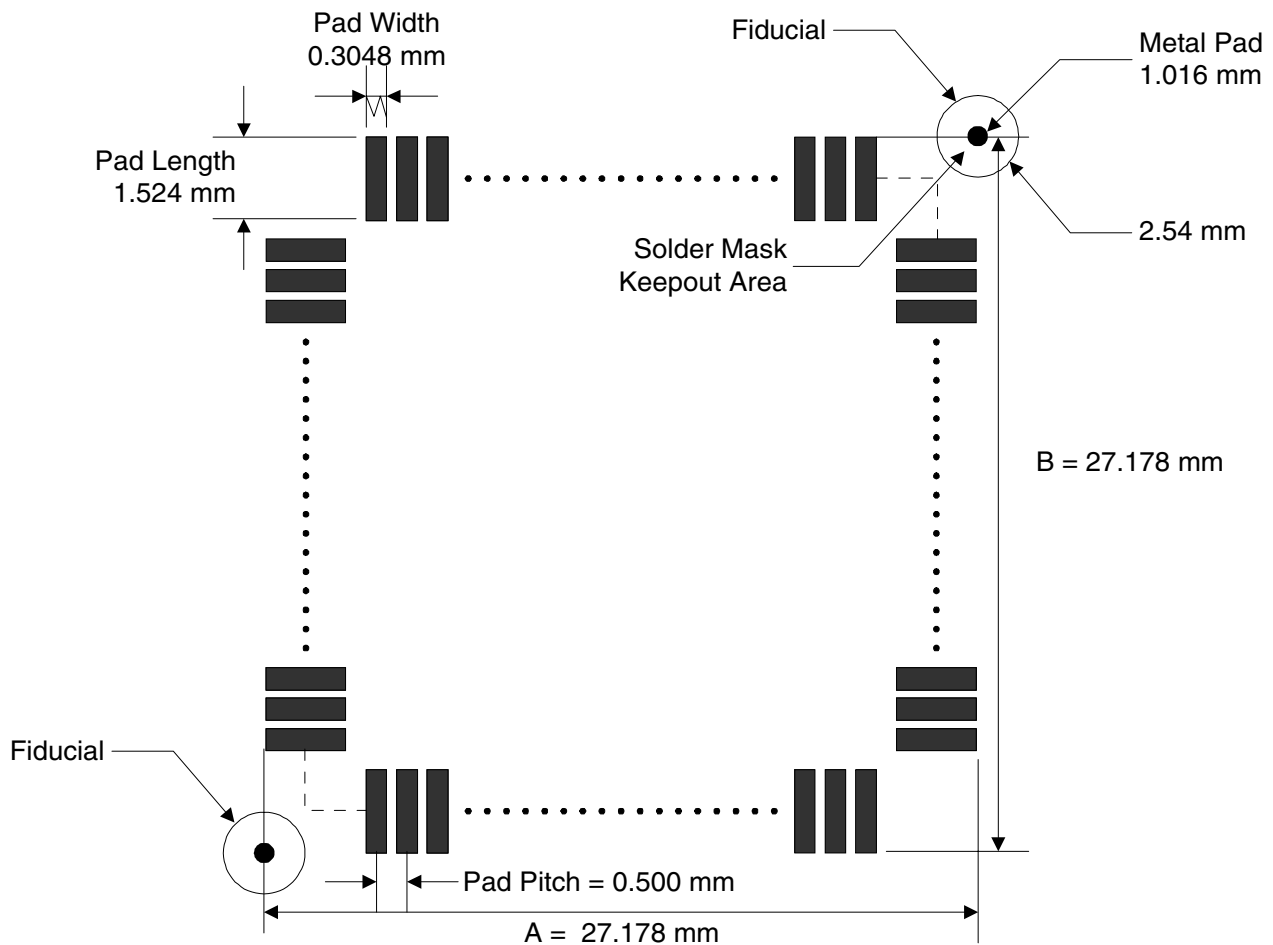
176-Pin PQFP PCB Layout Suggested Land Pattern
